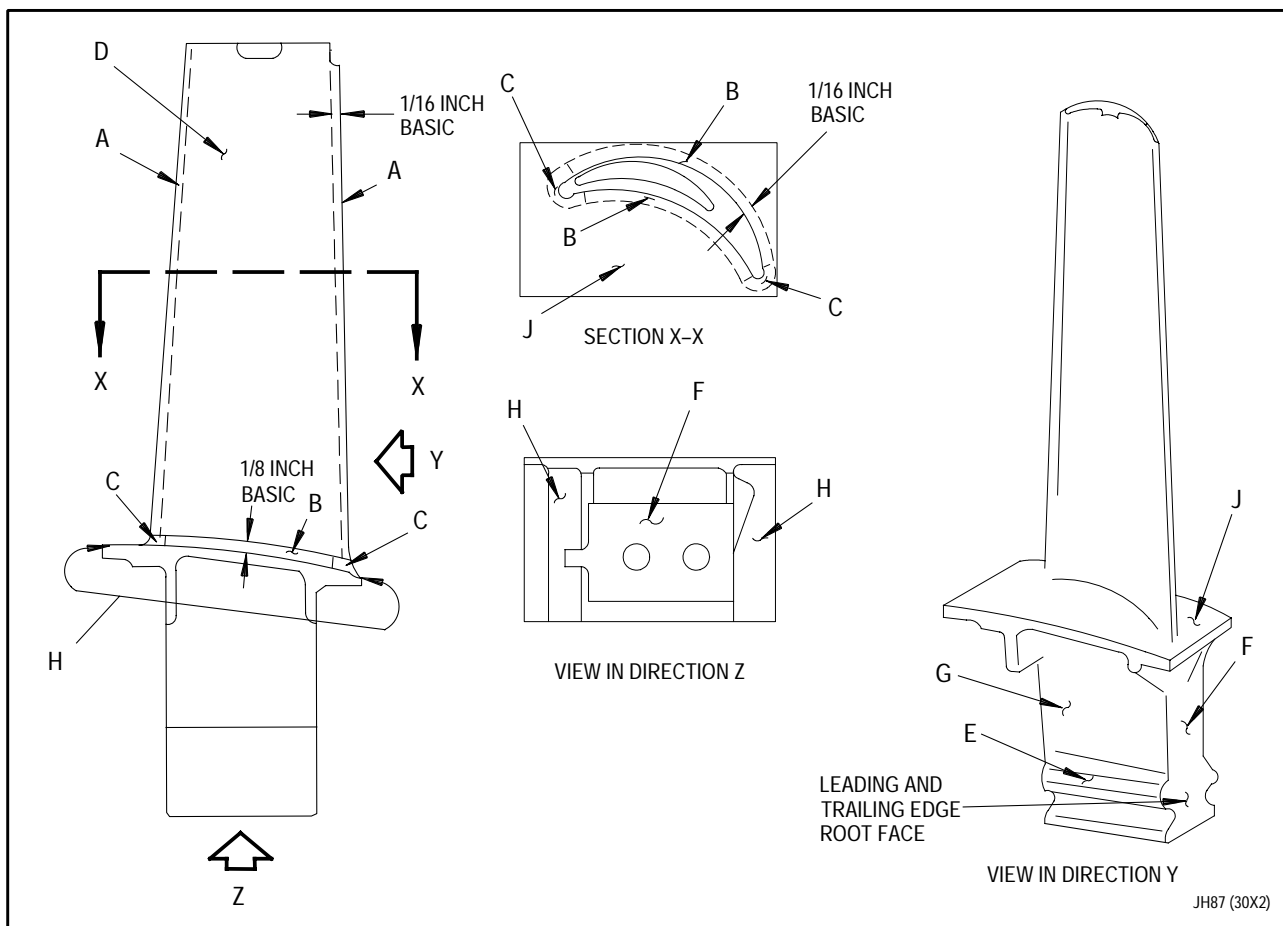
Second Stage Turbine Rotor Blades - Typical Views of Coating Cracking
